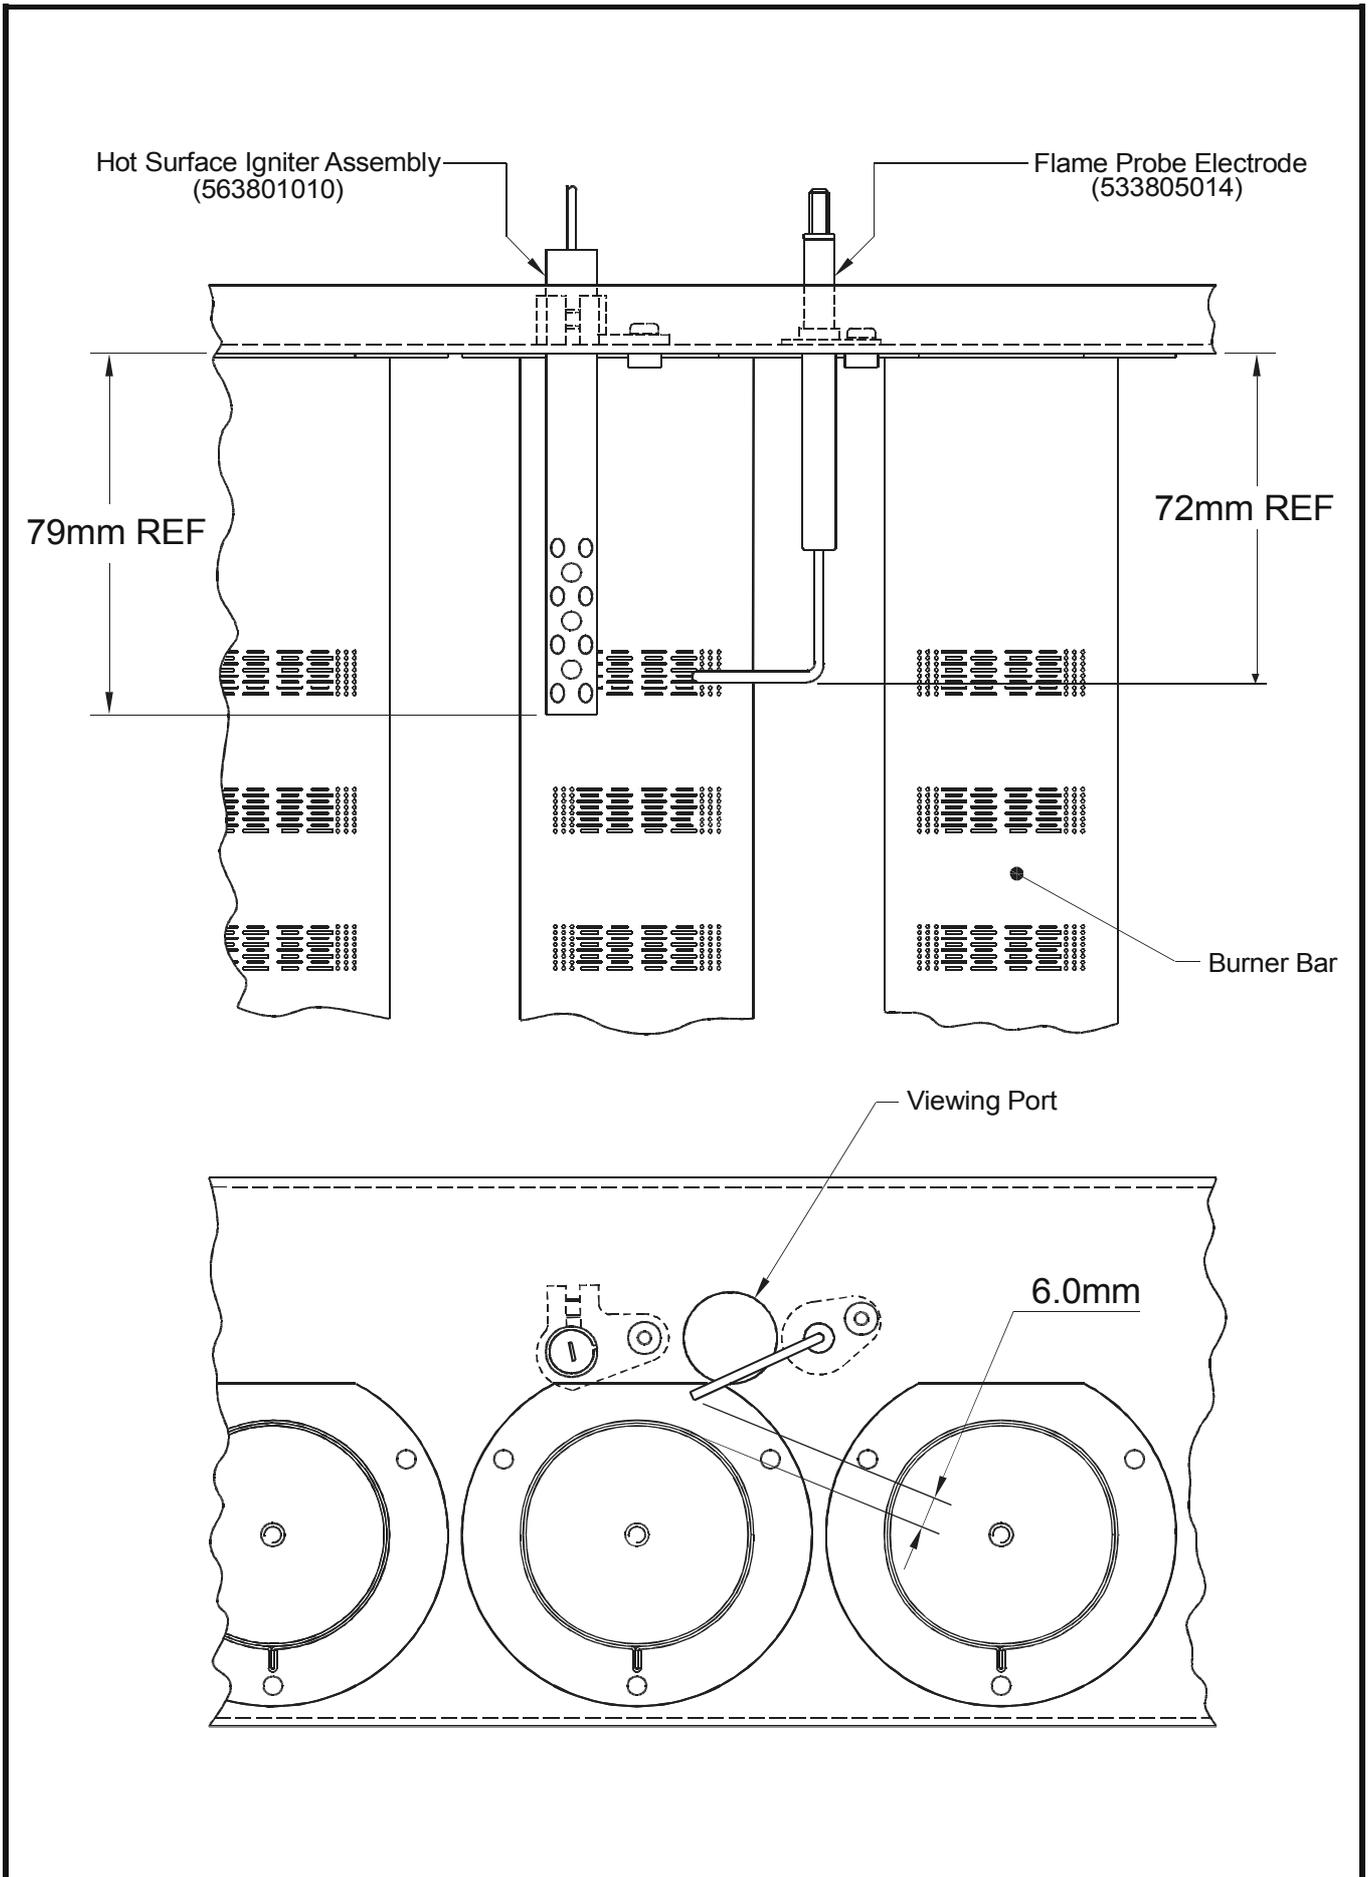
Diagram of Hot Surface Igniter and Sensing Probe Assembly
